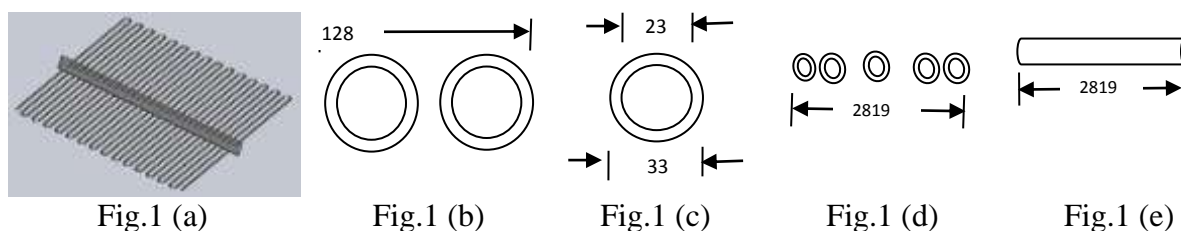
(a) Geometry boiler tube, (b) Distance between two conjugate tubes,(c) Dimension of each tube,(d) Total length of boiler , and (e) Total length of boiler each tube.
